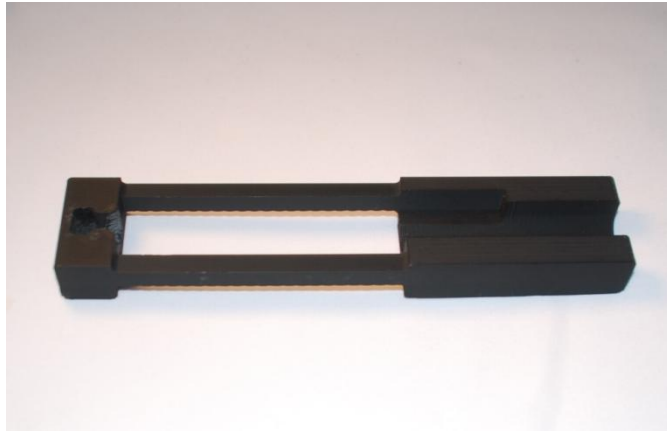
Rapid Prototype Instrument Actuator Holder
